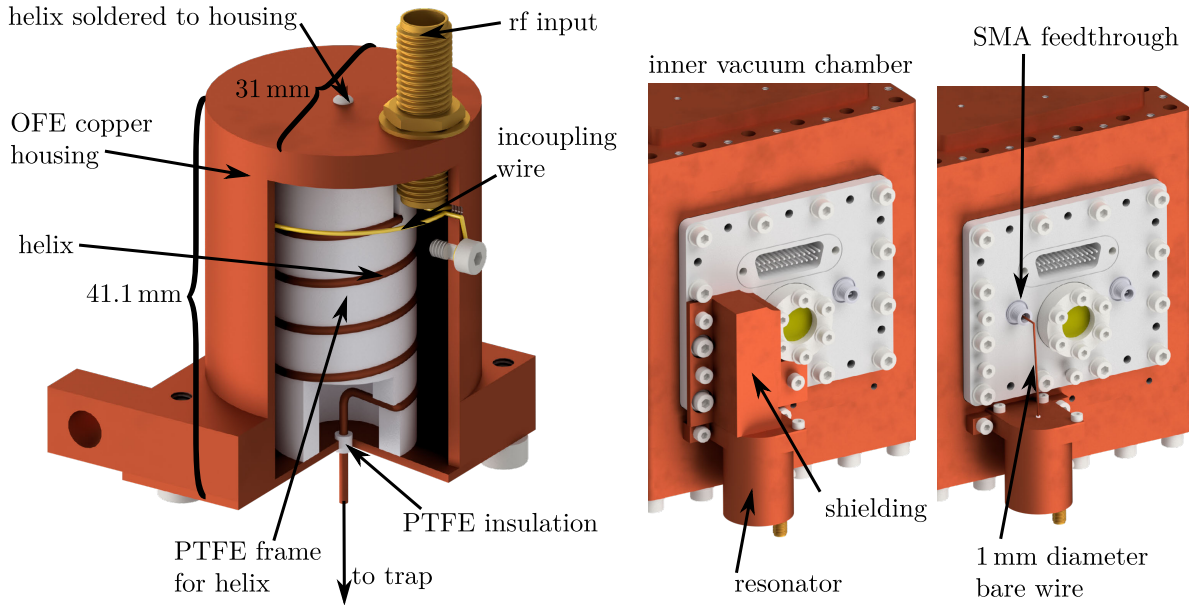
Left: Cut-view rendering of the rf resonator. Middle: Resonator mounted on the inner vacuum chamber. Right: Copper shielding removed to make wire visible. A male SMA tip is soldered to the wire and plugged into the SAM feedthrough.
